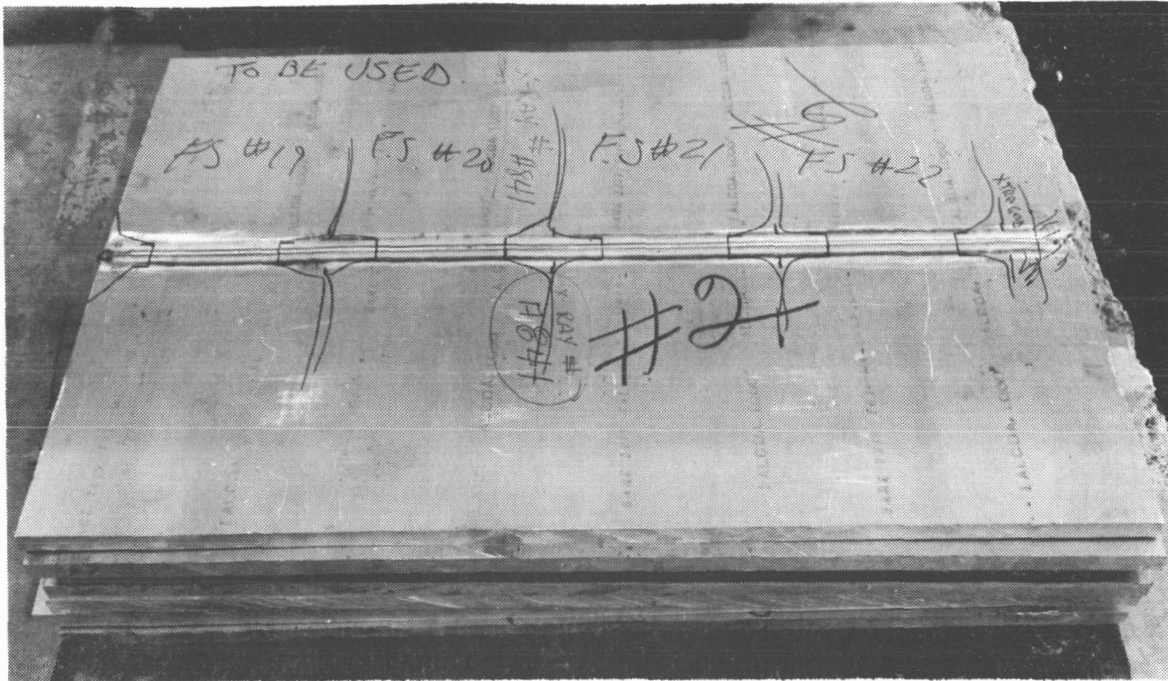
Welded 1.0-Inch Thick Plate Sections of 2219-T81 Aluminum Alloy
